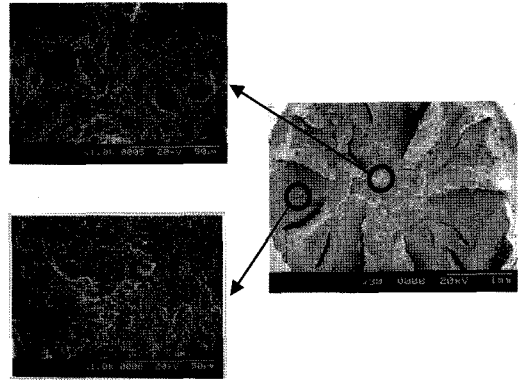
Fractography of a surface fractured by tensile load in a dissimilar friction welded joint (JLF-1 & STS304) using SEM
